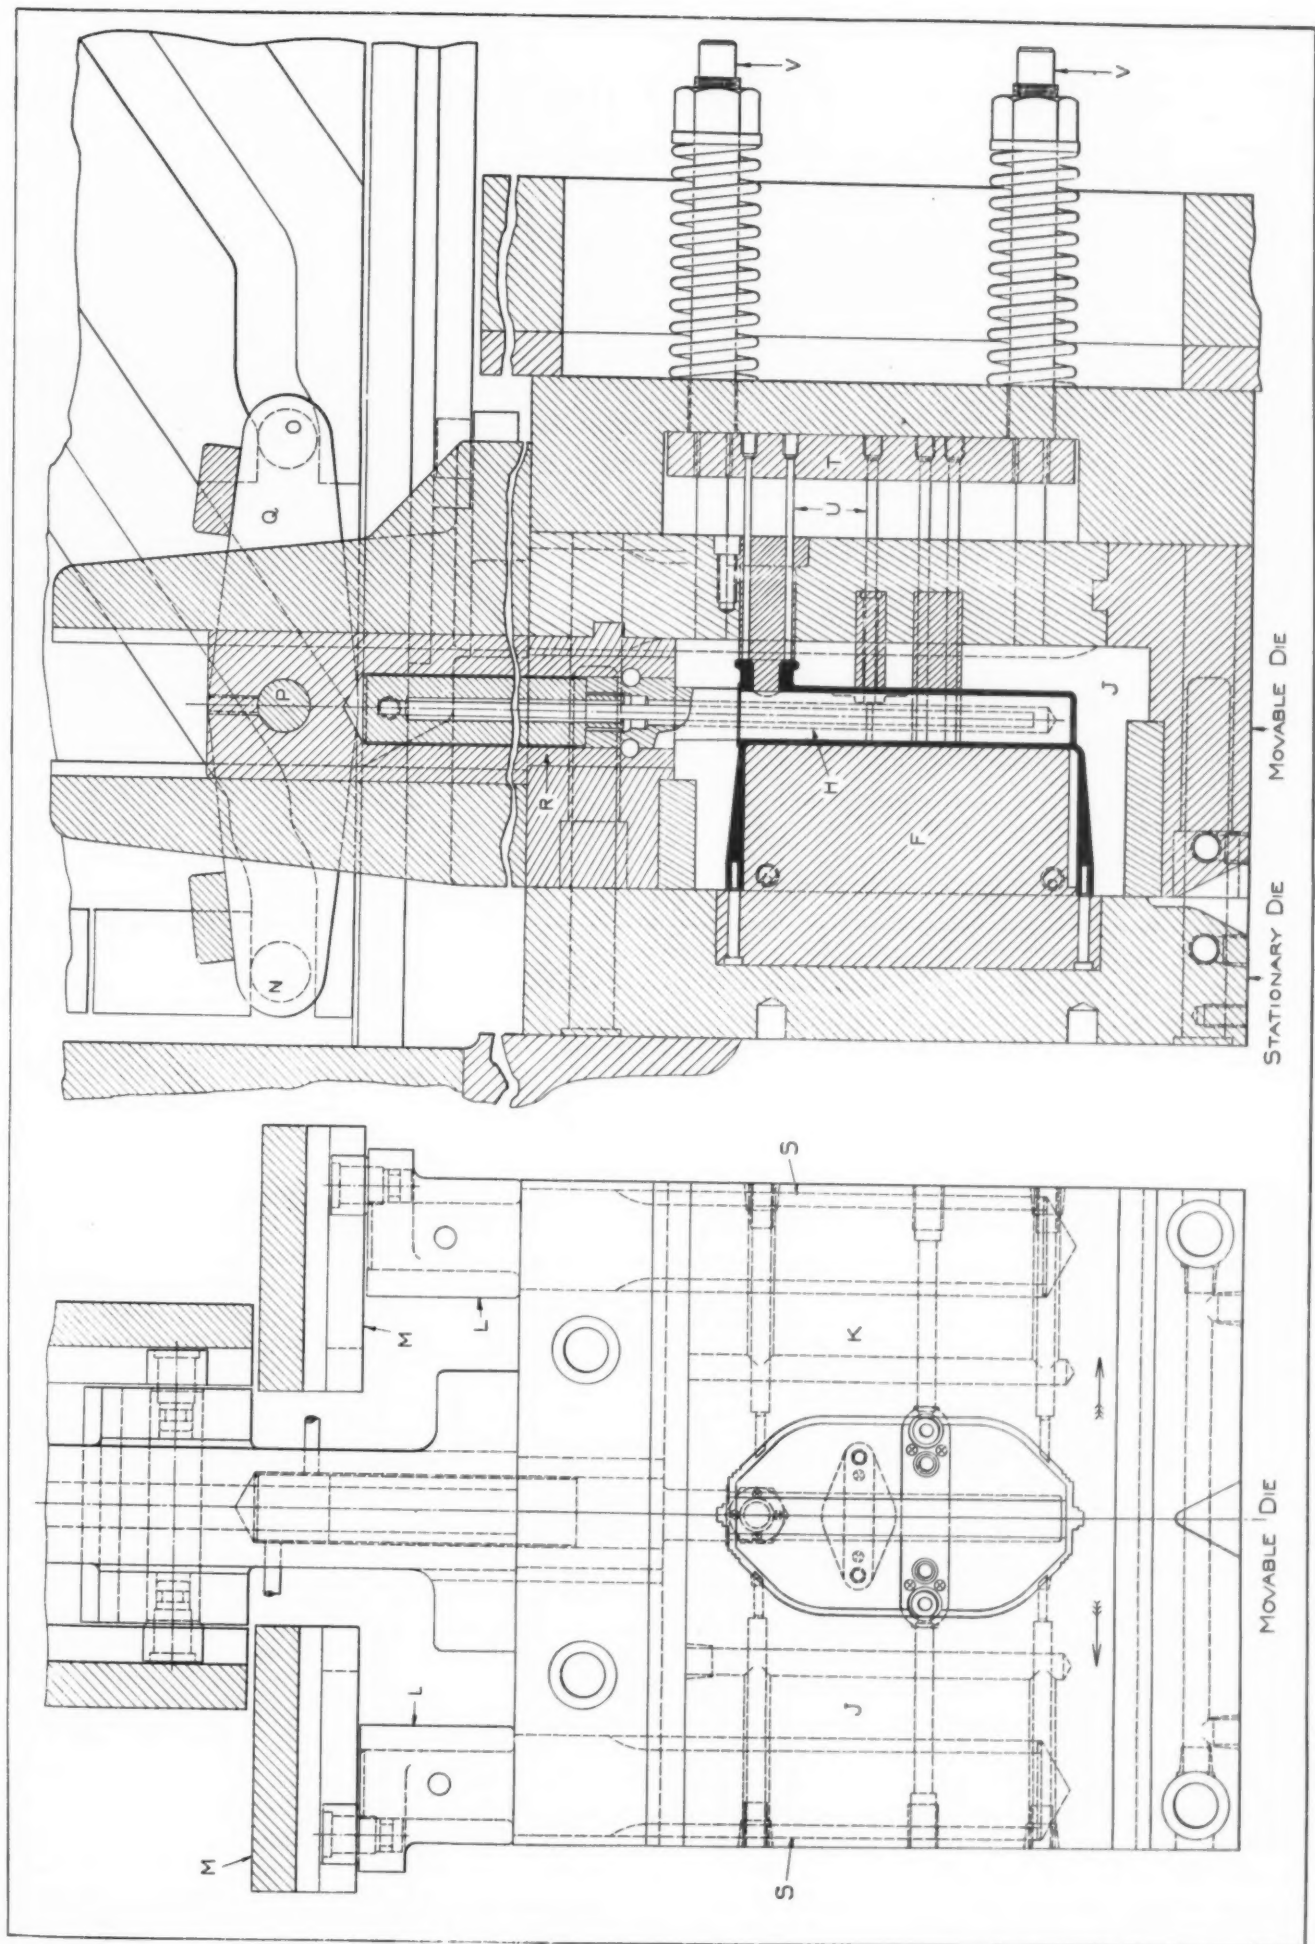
Construction Drawing, Showing the Mechanisms for Operating the Slides and Long Core of the Dies Shown in Figs. 3 and 4
